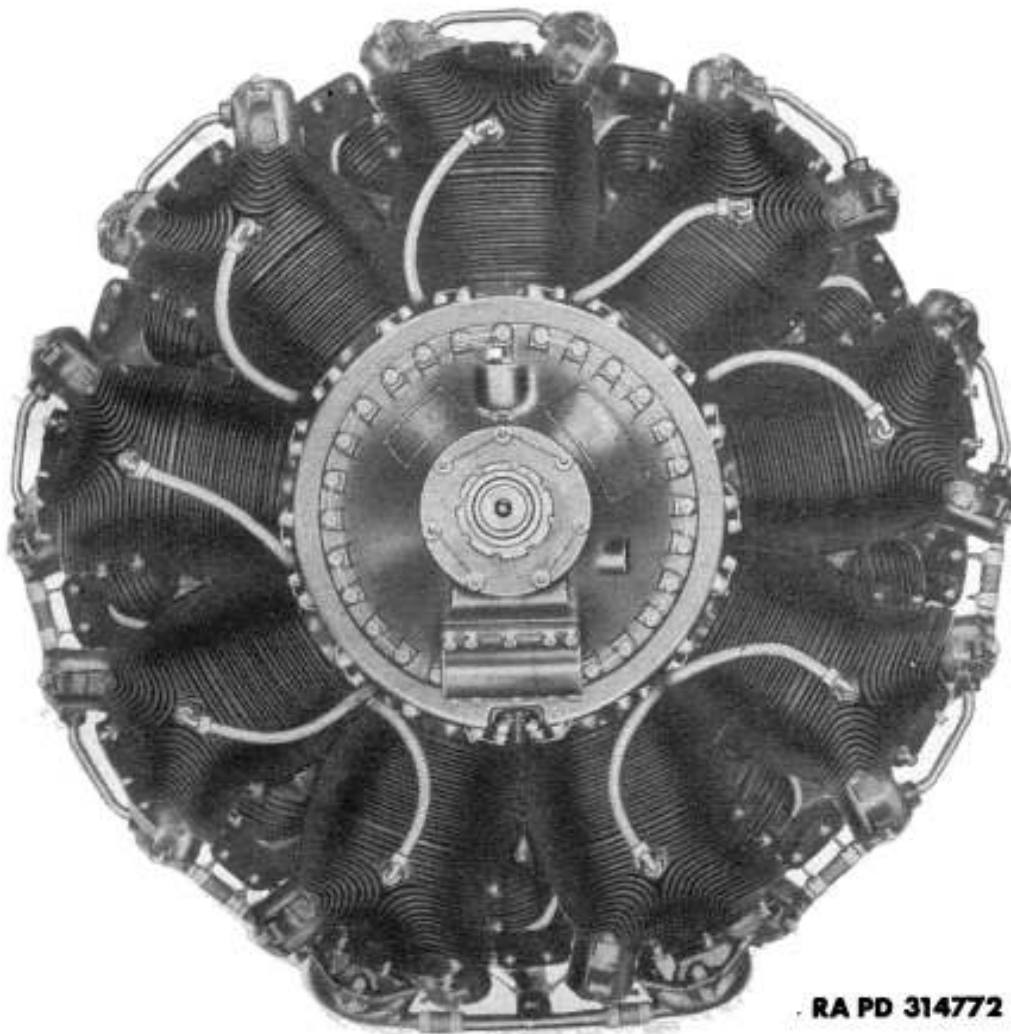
Front View of Engine with Cowling, Clutch, Flywheel, Fan, and Engine Front Support Bar Removed
